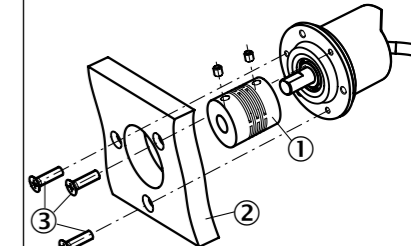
Installation DBS50 face mounting flange via mounting spigot
